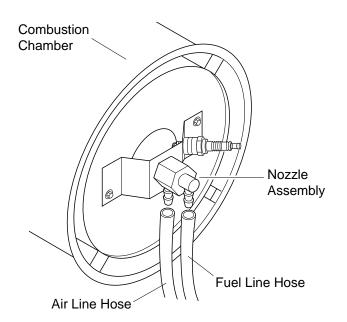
Removing Air and Fuel Line Hoses, 8,8 kW (30,000 BTU/Hr) Model
